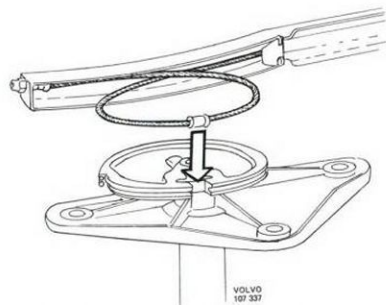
Installing cable for drive link and parallel drive link, left-hand side
